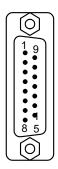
SDU Front Connector, Face View of Engaging End. (DB15F)
